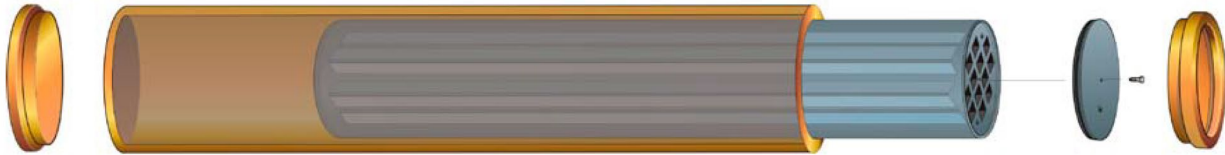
Exploded view of the canister with copper base, copper shell, cast iron insert, steel lid, and copper lid [4].
